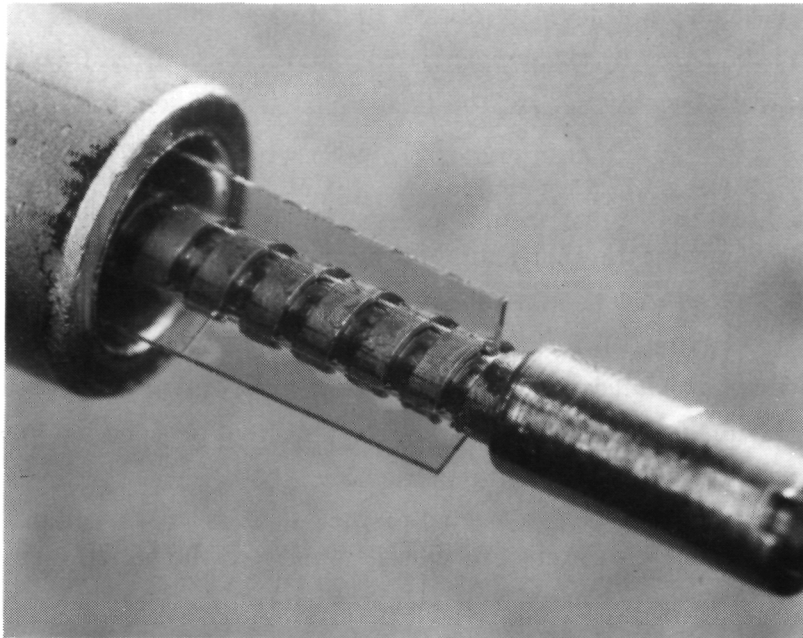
Diamond supported helix assembly using new fabrication technique.
